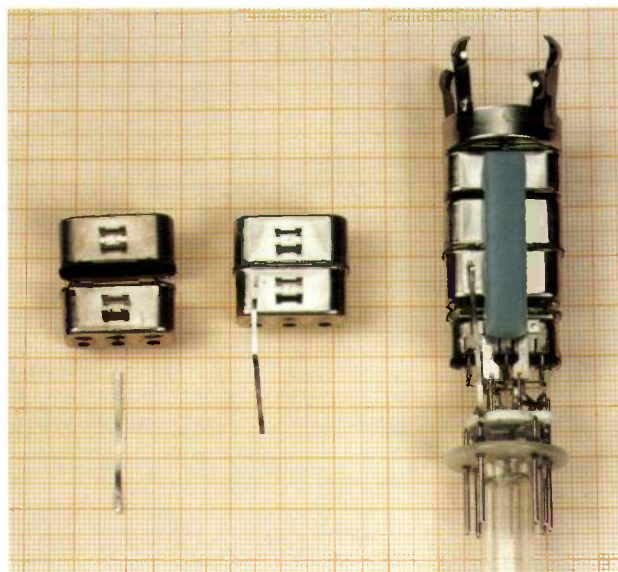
A product made with the laser spot-welder. Left: two grids ('grids 3a and 3b') and a contact strip for a gun for a colour television picture tube. Centre: the two grids and the contact strip welded together by 5 spot-welds. Right: the complete gun, which contains about 80 spot-welds.
